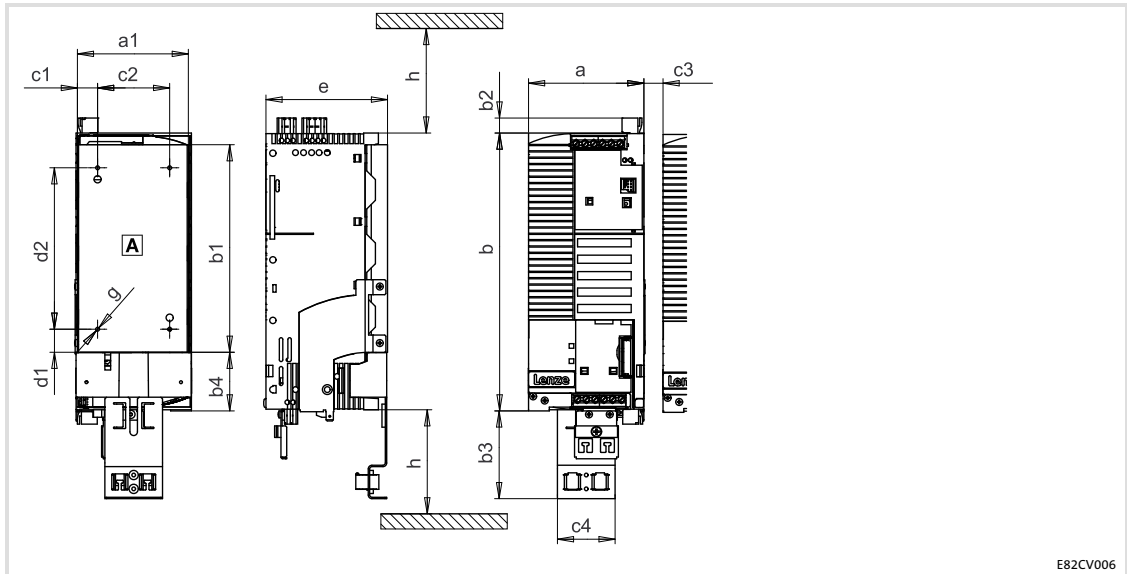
Dimensions for mounting in "cold plate" technique 3 ... 11 kW
